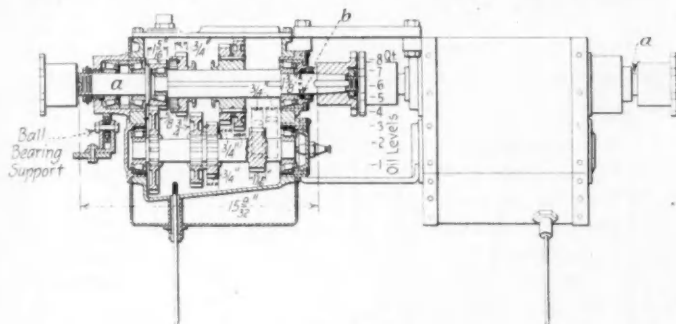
CONSTRUCTION AND PRINCIPAL DIMENSIONS OF THE TWO GEARSETS TESTED
